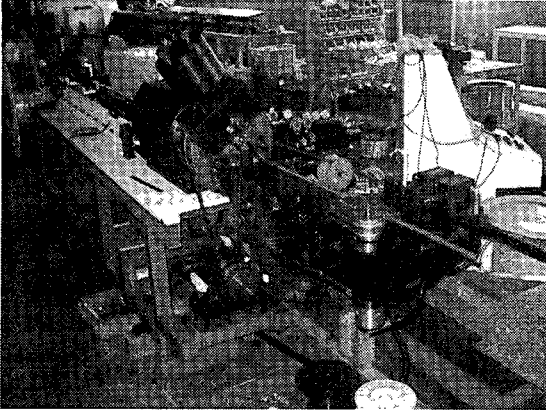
Prototype of the high speed feeding type three dimensional bending machine
